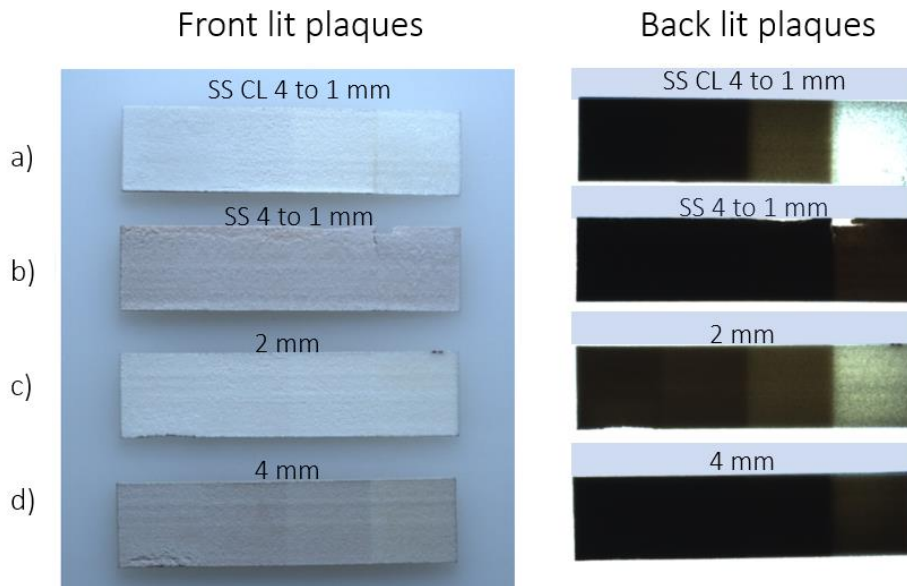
Parts printed on Multi Jet Fusion platform using opacifying agent both with normal lighting conditions on the left and backlit on the right. (a) Modulating both opacifying agent and thickness of opacifying part. (b) Modulating just the opacifying part thickness. (c) Modulating just opacifying agent across a 2mm sample. (d) Modulating just opacifying agent across a 4mm sample.
